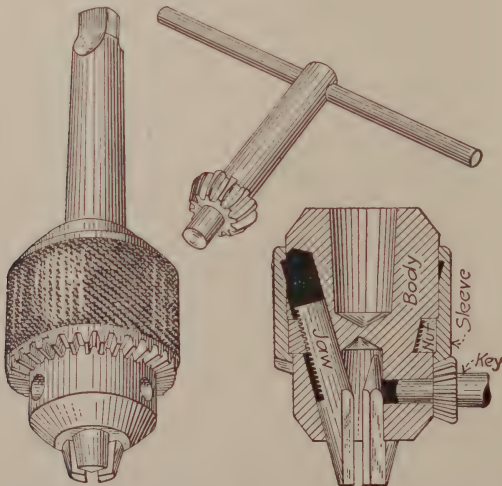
Jacob's drill chuck. One of the best and most popular chucks. The chuck may be taken apart by forcing the sleeve off over the jaw end of the chuck, when the nut, which is made in halves, may be taken out leaving the jaws free. Have the jaws partially closed before forcing off the sleeve.
